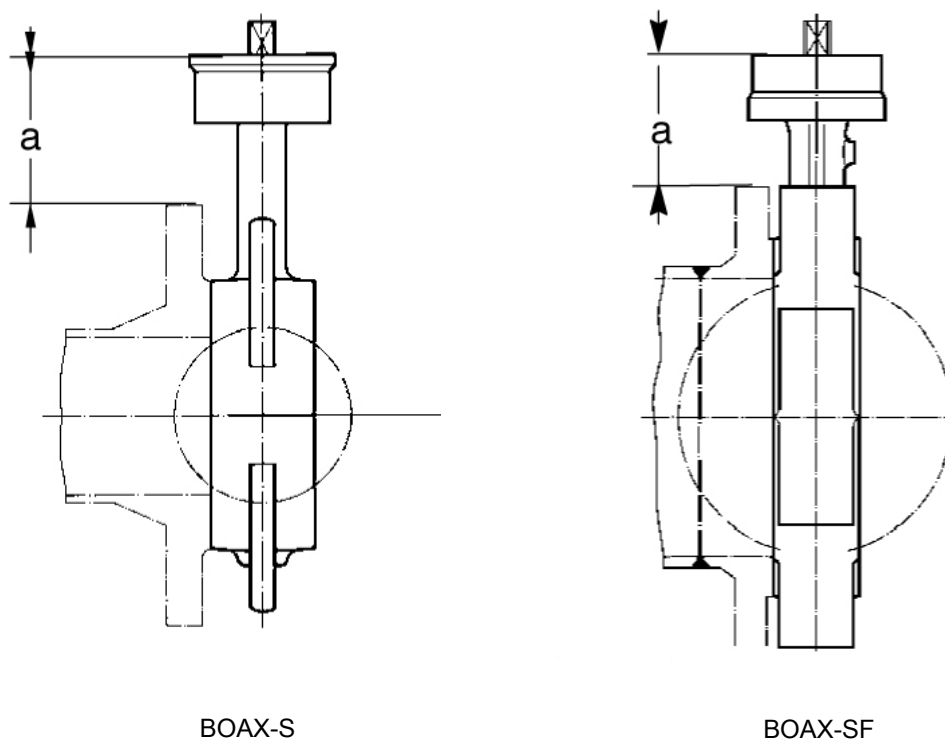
Flange connection for BOAX-S and BOAX-SF
